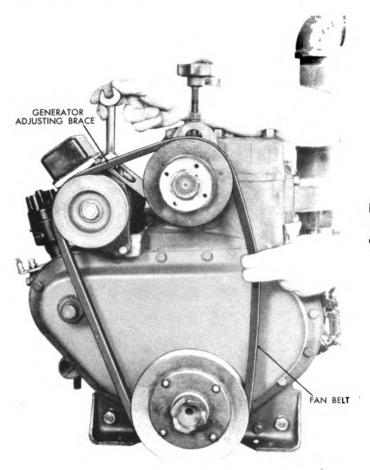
Check belt slack (Fan blades removed for clear view of pulleys and belt).
